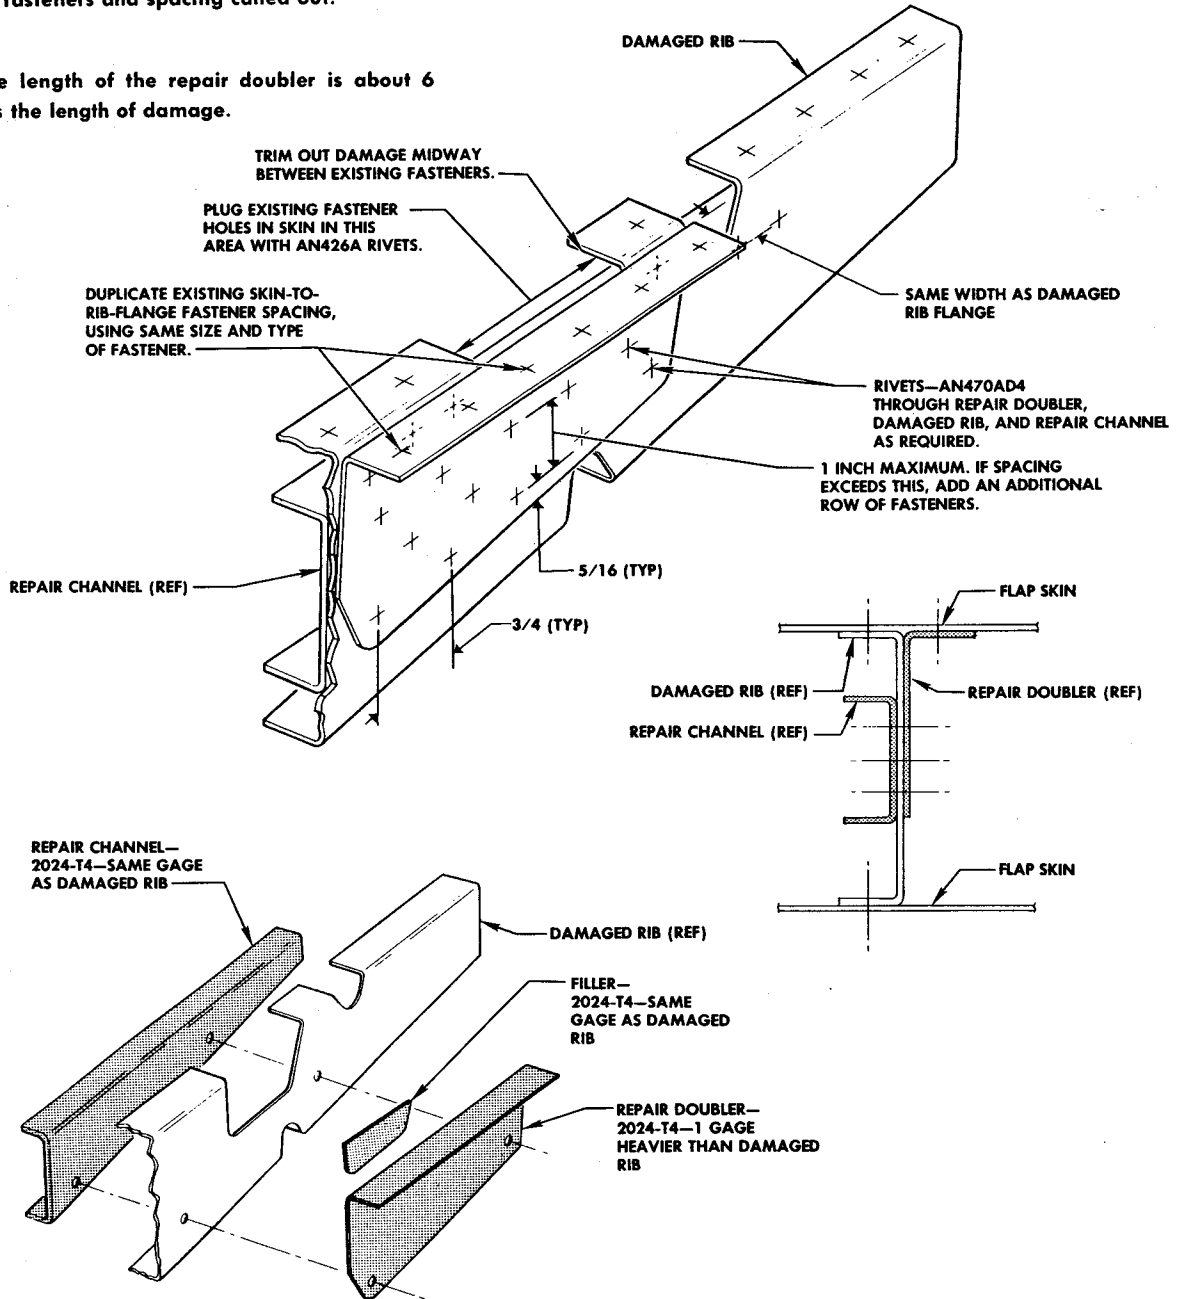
C. Flap Air Load Rib Repair (Sheet 2 of 2)
